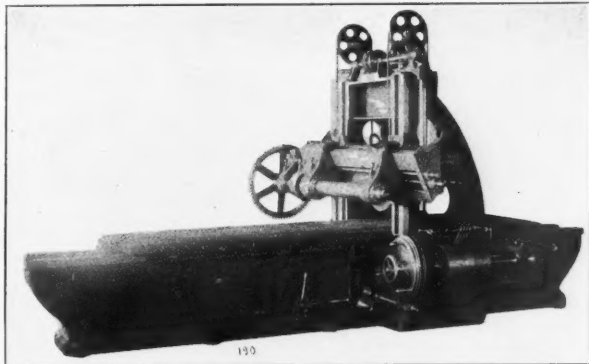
The Ingersoll 24-in. Standard Type of Horizontal Milling Machine.
